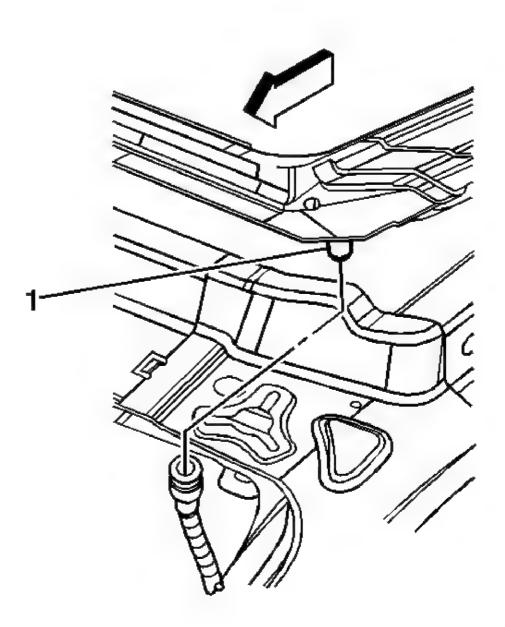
Identifying Drain Spout Courtesy of GENERAL MOTORS CORP.
